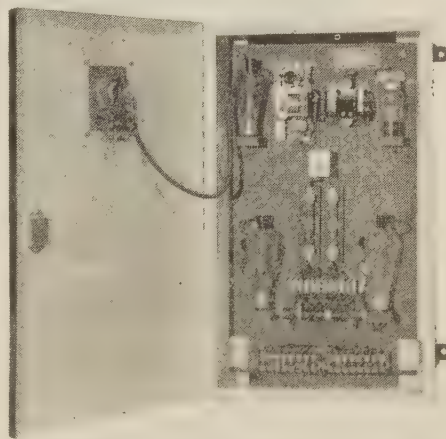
(a) ELECTRONIC TIMER CONTROLS DURATION OF HEAT PULSE, FOR RESISTANCE WELDER
